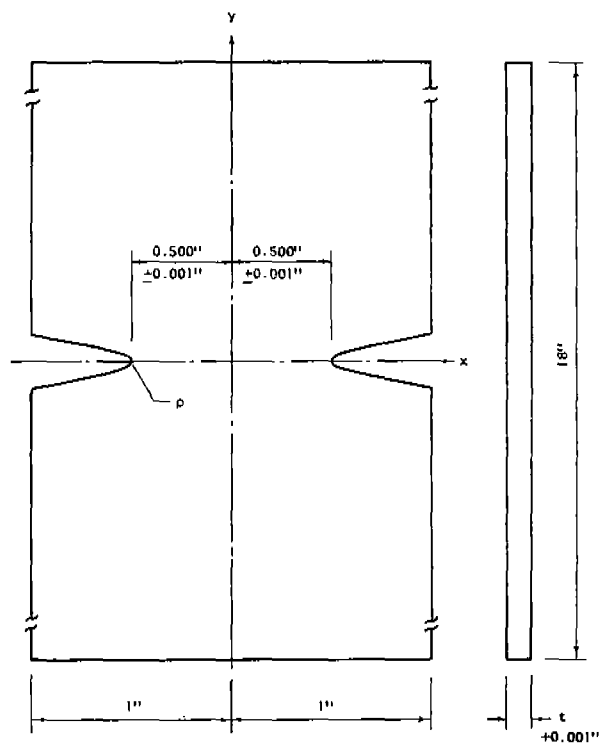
SPECIMEN AND NOTCH DETAILS.
